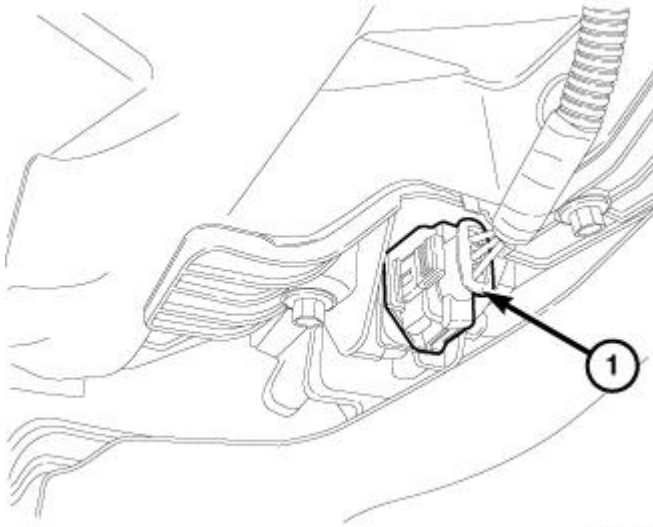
Crankshaft Position Sensor (CKP) Harness Connector
